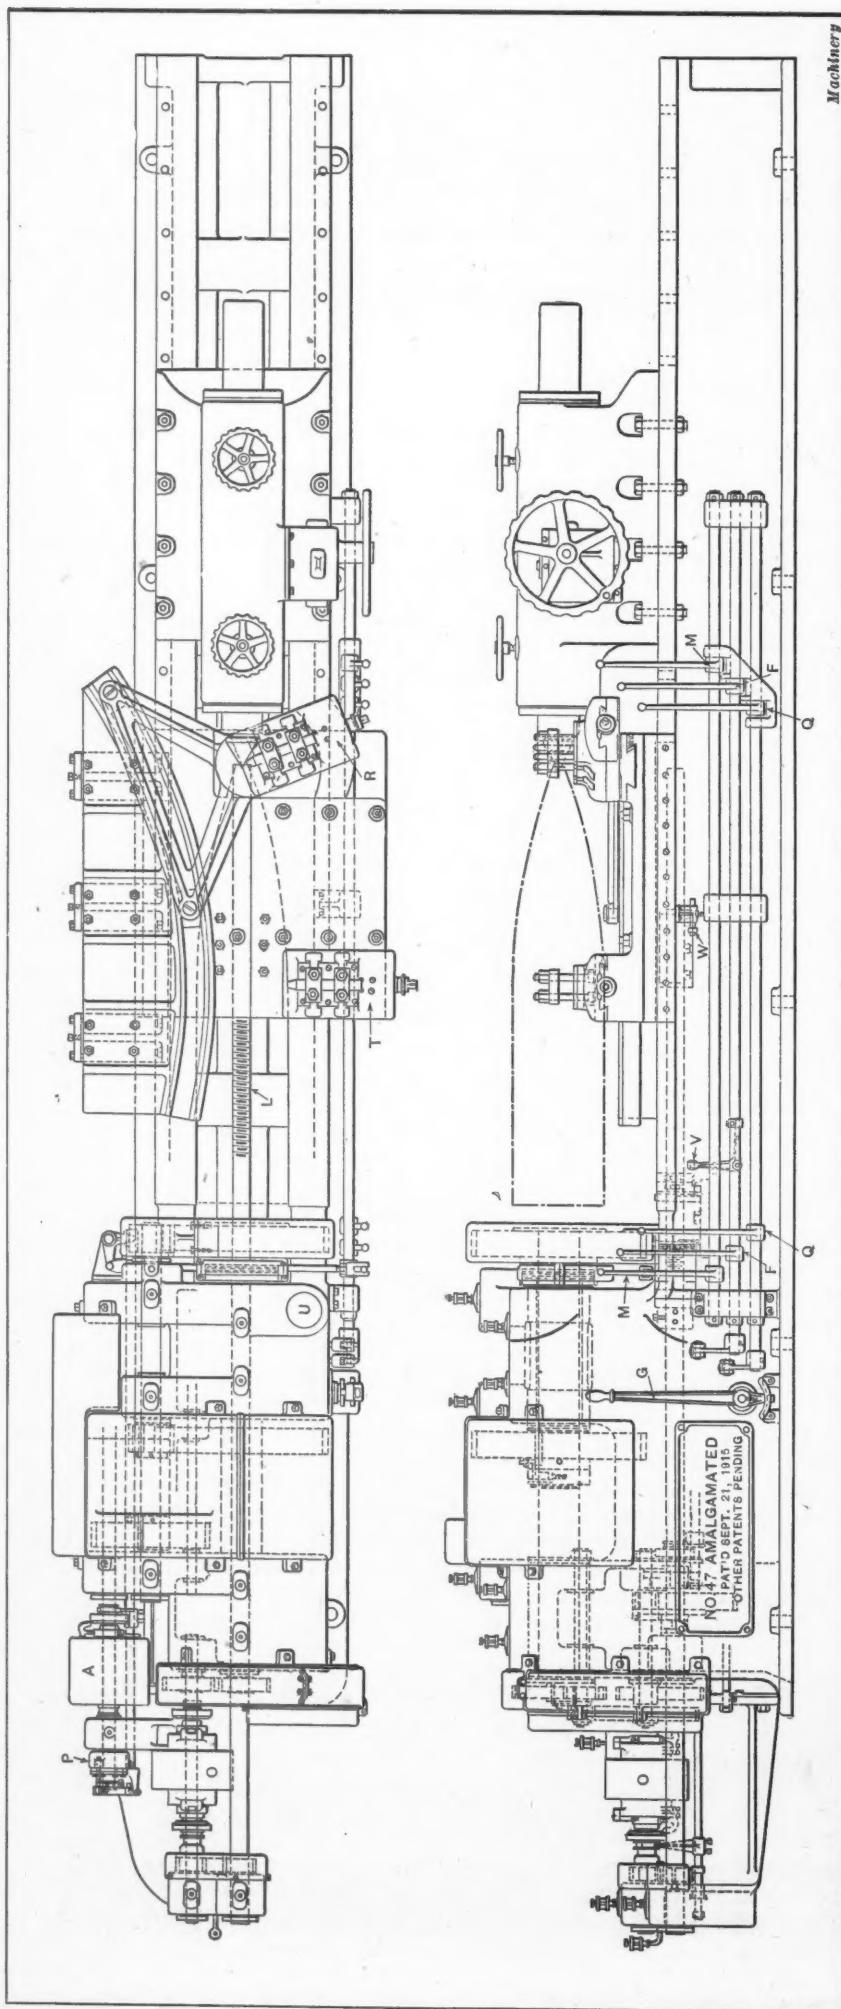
Front and Plan Views of the No. 47 Amalgamated Shell Turning Lathe shown in Fig. 1. This illustration shows more clearly many of the features of the equipment of this machine.
